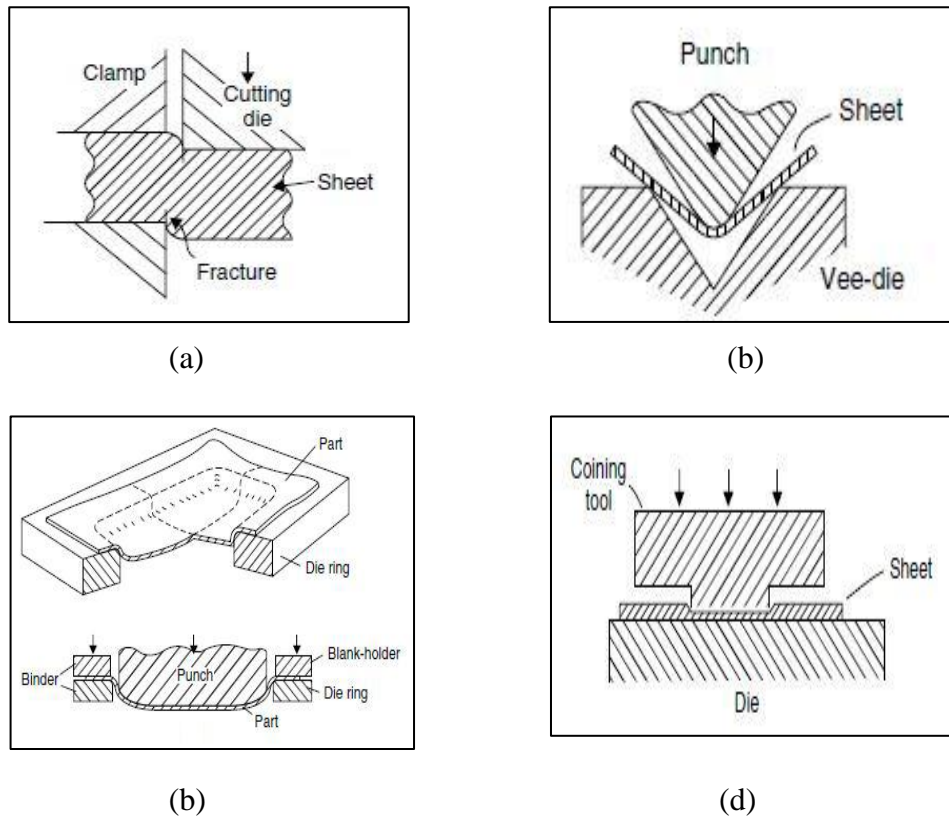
(a) Basic cutting process of blanking a piercing. (b) Example of sheet metal bending process. (c) Typical part formed in a stamping or draw die. (d) Thinning a sheet locally using a coining tool.
